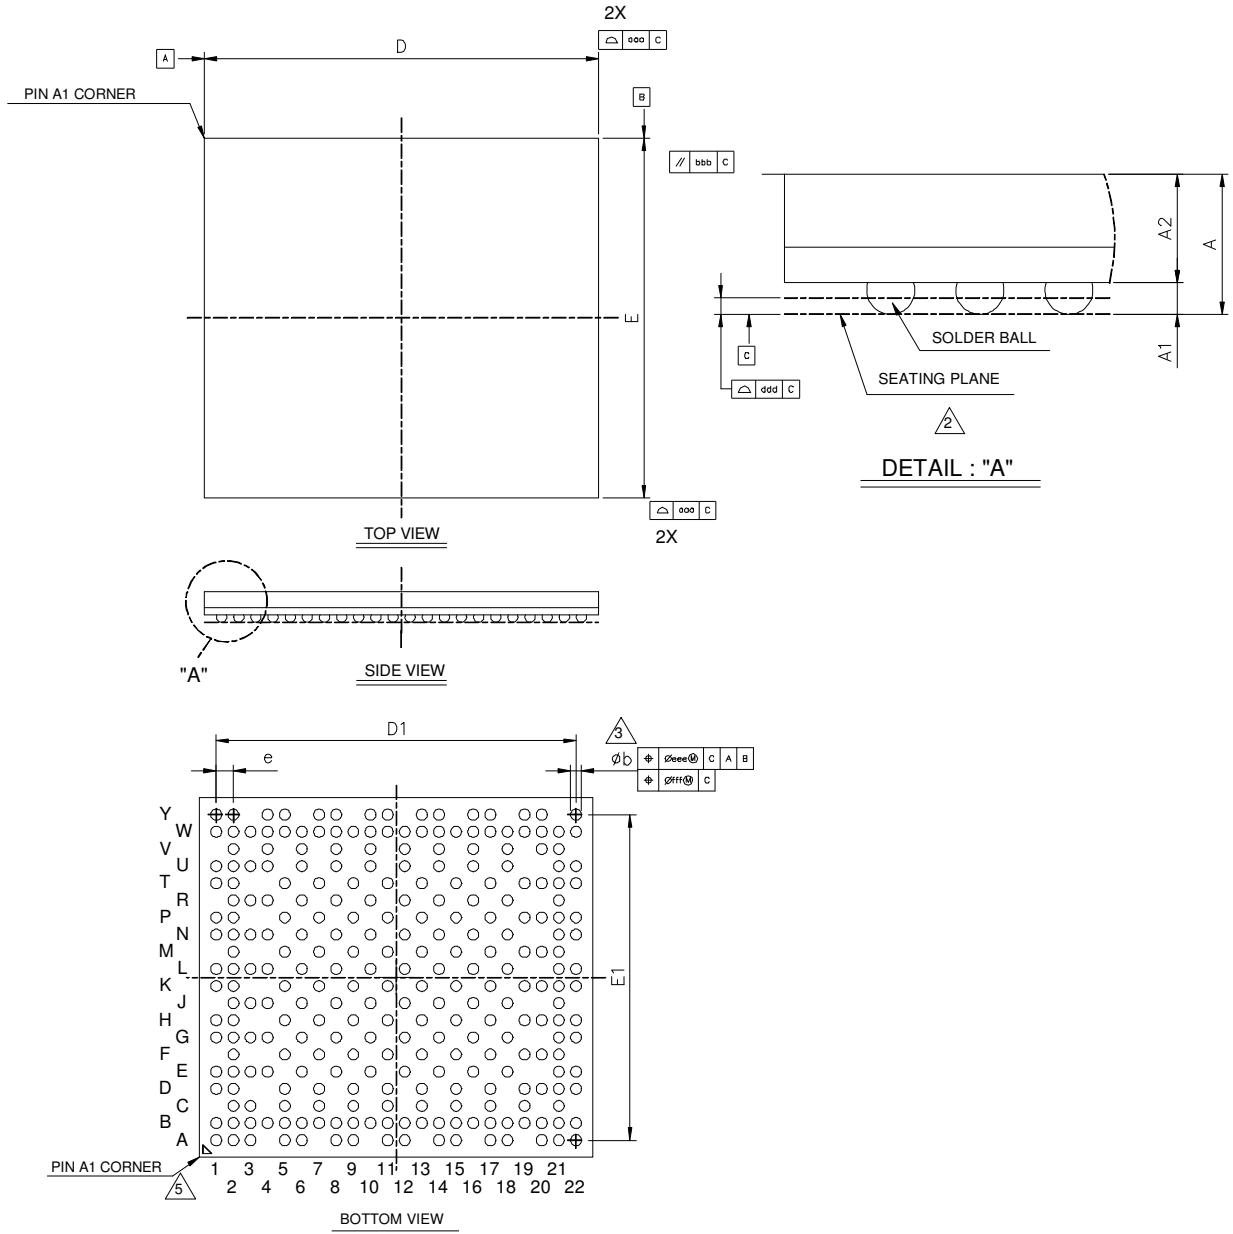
TFBGA 11.5 x 10.5 mm 271B Package Dimensions
